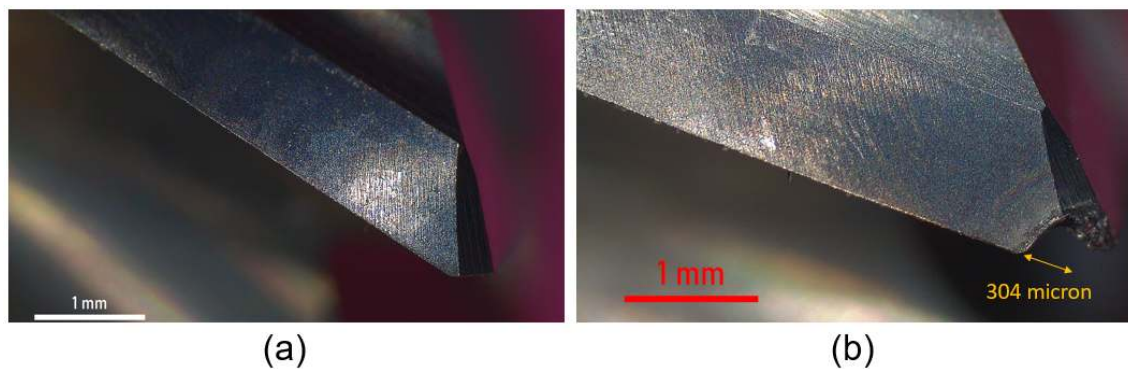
The stereomicroscope measurement results of (a) the fresh tool and (b) the chipped tool.
